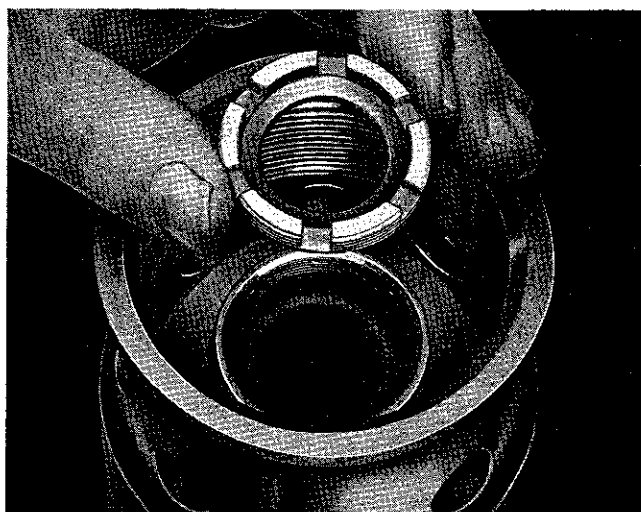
Installing Piston Oil Seal Nut in Piston —
